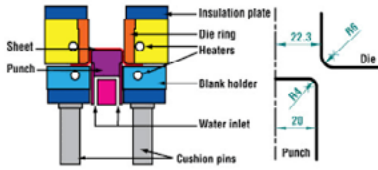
a & b: Schematic arrangement of tool steel and Hot Forming of Al-heat treatment heat treatment graphic.
